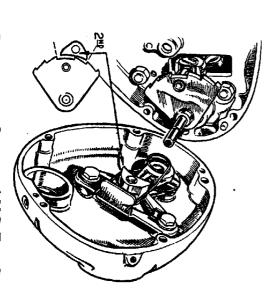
PAWL-OPERATING SPRING ON A.M.C. TYPE GEARBOX.
